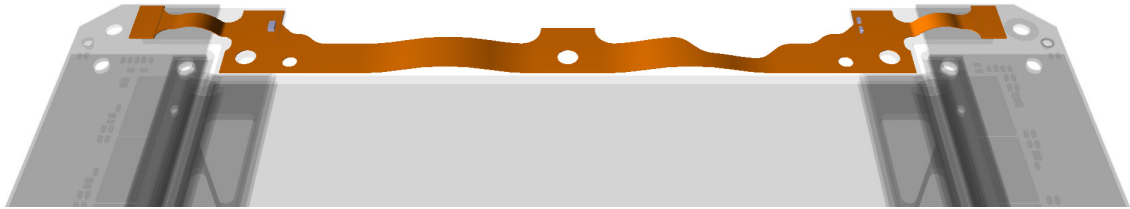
Illustration of the ground-balancing PCB assembled into a 2S module and connected to the Front-End Hybrids. The rest of the module is grayed out.
